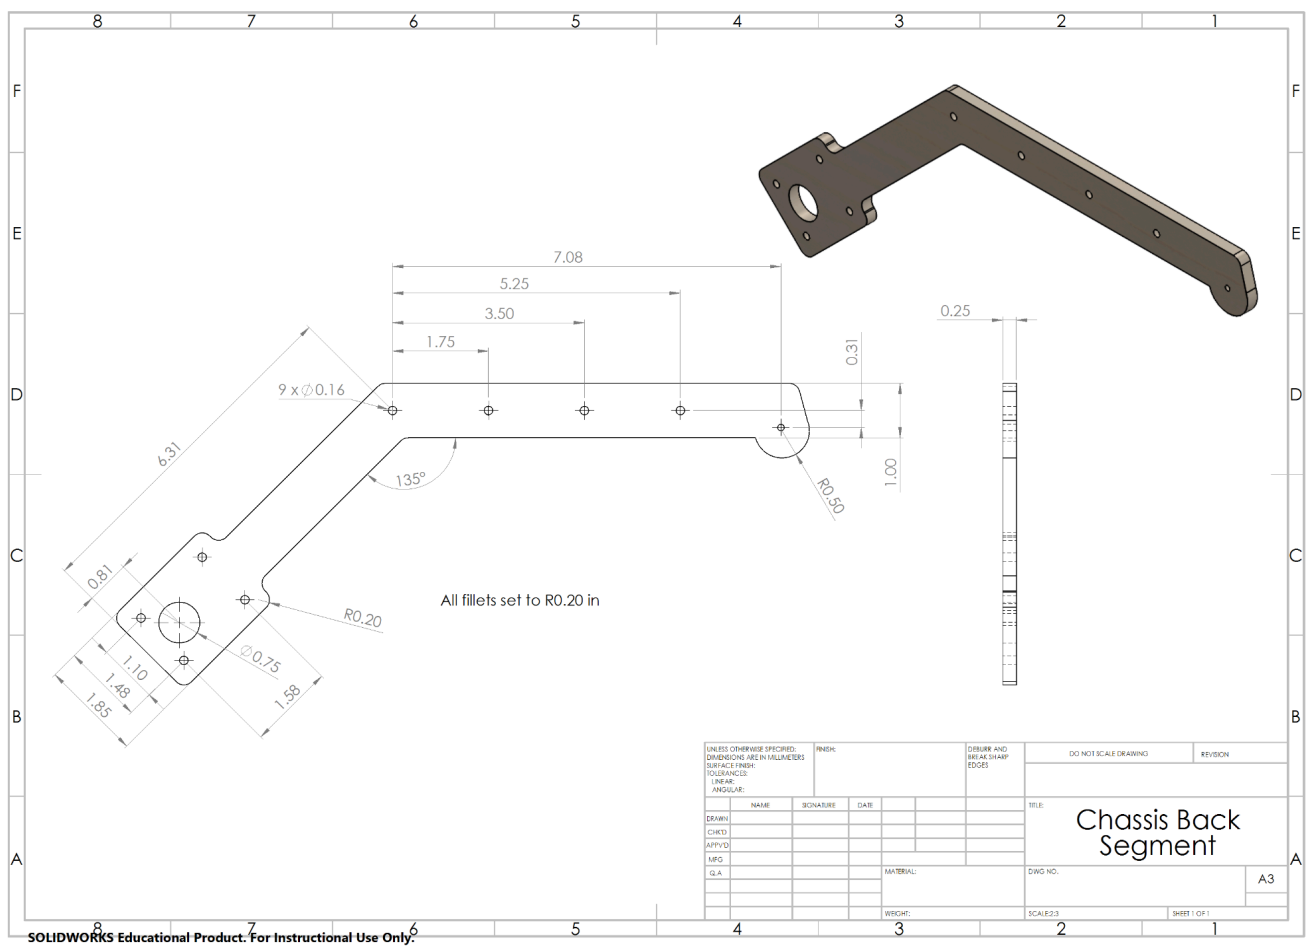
SolidWorks Drawing of Chassis Back Segment (Laser Cut)
